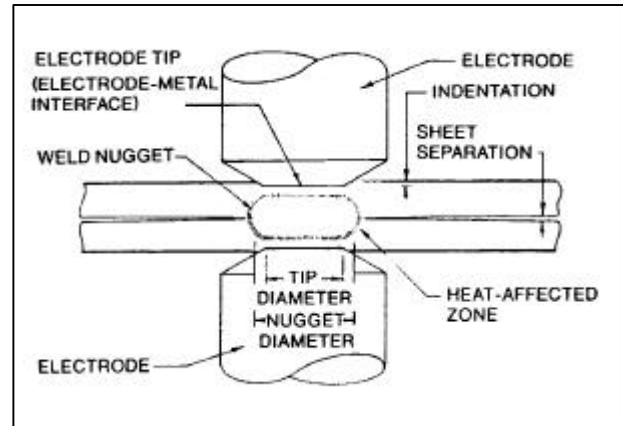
In spot welding, heat is produced by electrical resistance between copper electrodes. Pressure is simultaneously applied to electrode tips to force metal together to complete fusing process. Spot-weld-nugget size is directly related to tip size.
